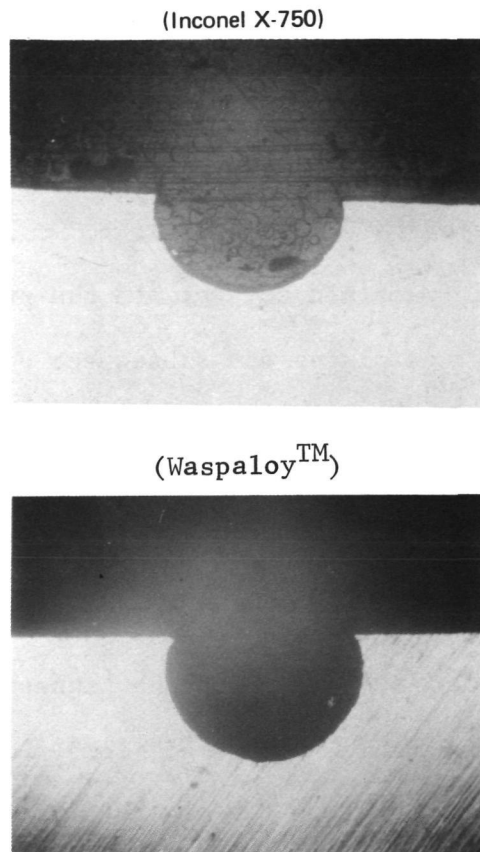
Section Views of Chemically Machined Inconel X-750 and Waspalloy
